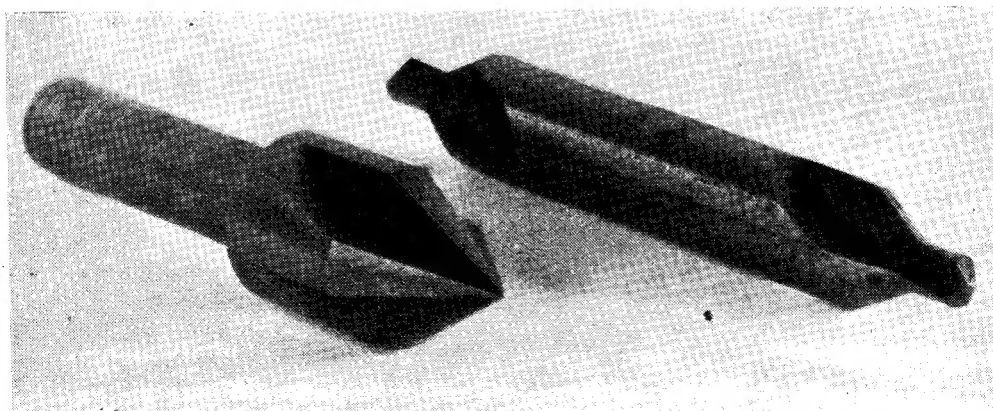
A countersink and a centre drill used for cutting holes in sheet metal
